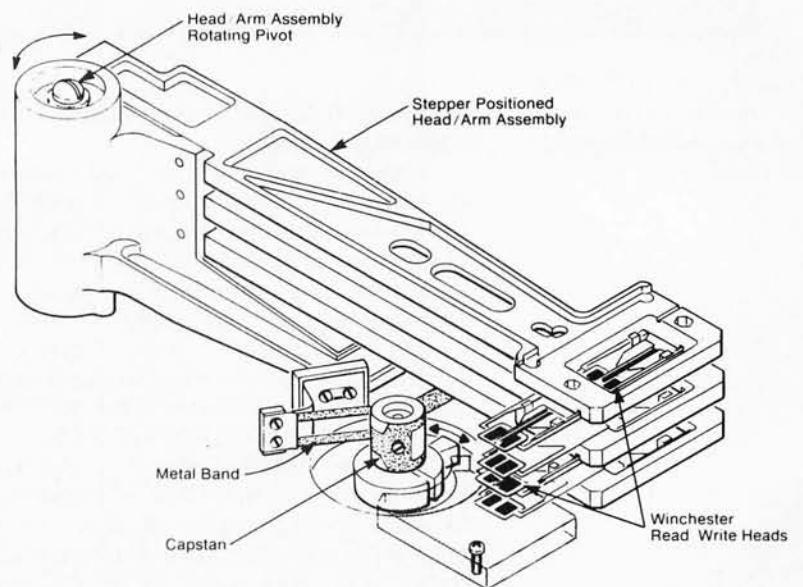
The Shugart SA4000 fixed disk head actuator assembly. A novel coiled-metal band driven by a stepper motor is used to position the head assembly. Graphics courtesy Shugart Associates.
